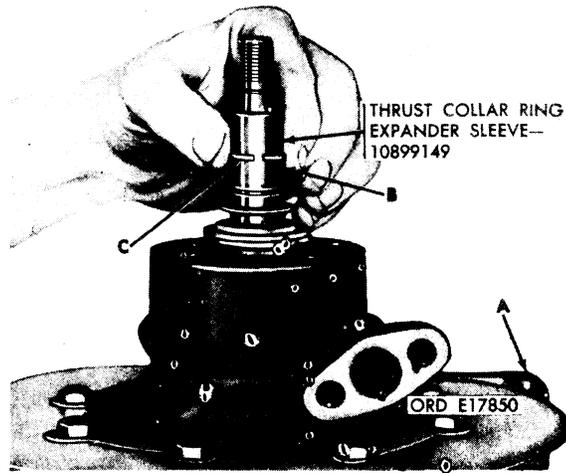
INSTALLING PISTON RINGS ON THRUST COLLAR ASSEMBLY OR FLINGER SLEEVE - TURBOCHARGERS 7748900 AND 10935279.
